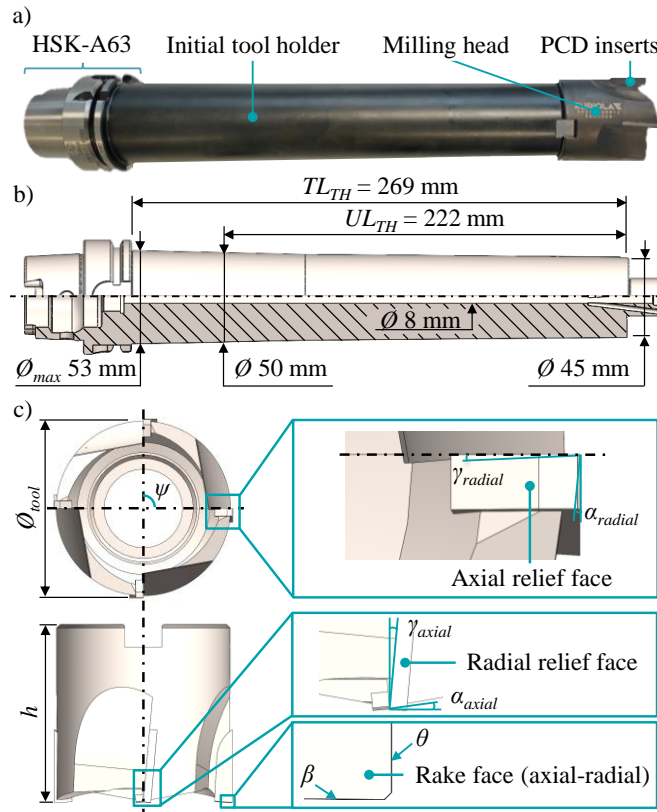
Case study: a) Initial cutting tool set description, b) initial tool holder design, and c) milling head cutting geometry.
